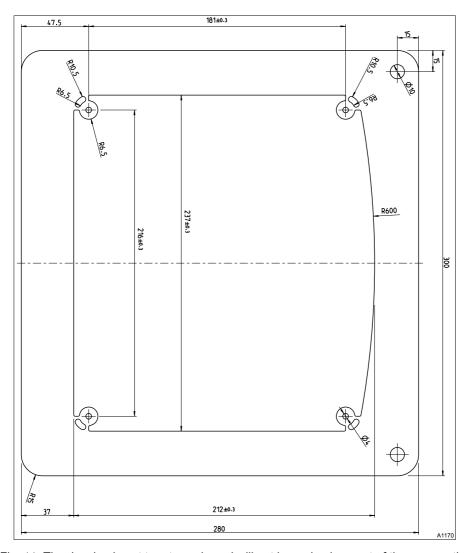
The drawing is not true to scale and will not be revised as part of these operating instructions. The drawing is for information only.
